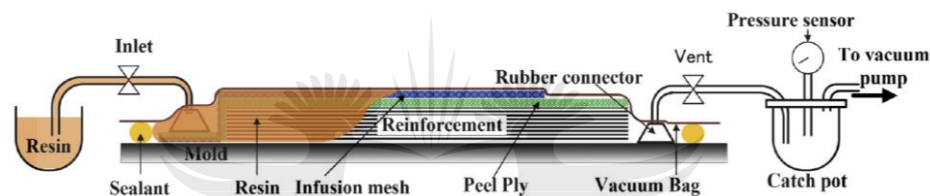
Vacuum-Assisted Resin Transfer Moulding (VARTM) [76]
